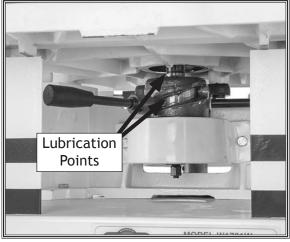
Lubrication points on spindle cartridge and spindle elevation housing.
